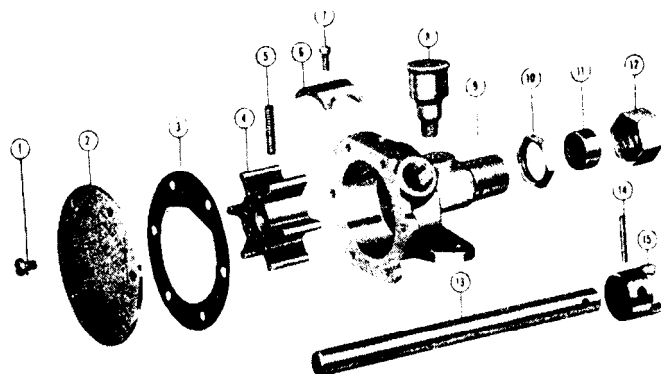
Water Pump—standard Single Neoprene Impeller Type
